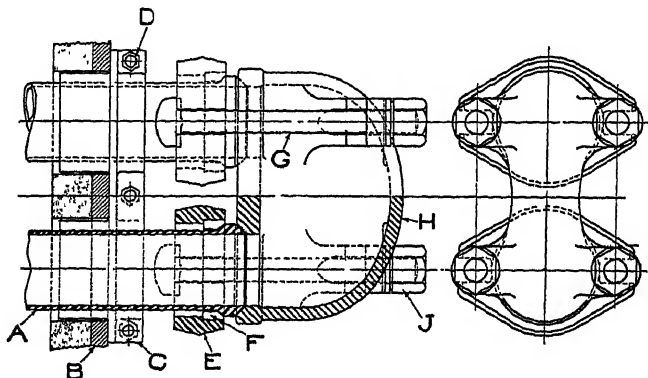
DETACHABLE JOINT BETWEEN A TUBE AND A RETURN BEND
